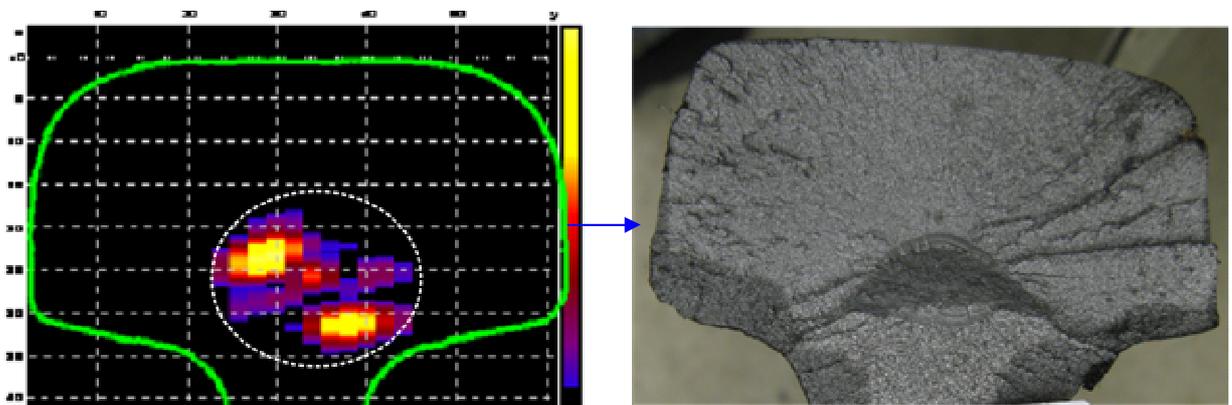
D-image (across the rail) of rail section with real flaw – transversal crack in the weld (left pane) and photo of fracture at the defected section (right pane)
